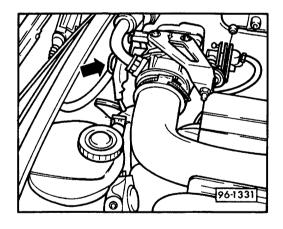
Throttle valve potentiometer G 69 with idling switch F 60
